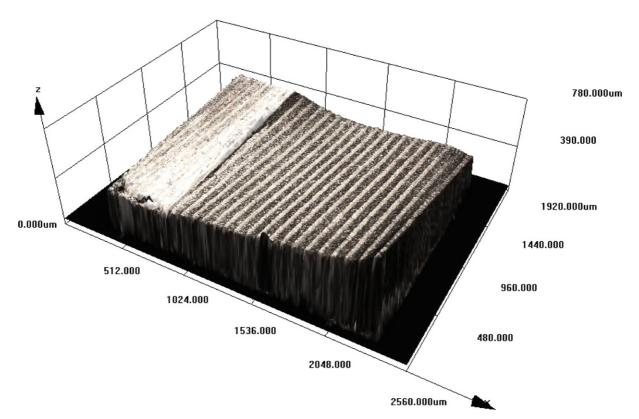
3D reconstruction of the fracture surface of SEVNB specimen A2Z1.
